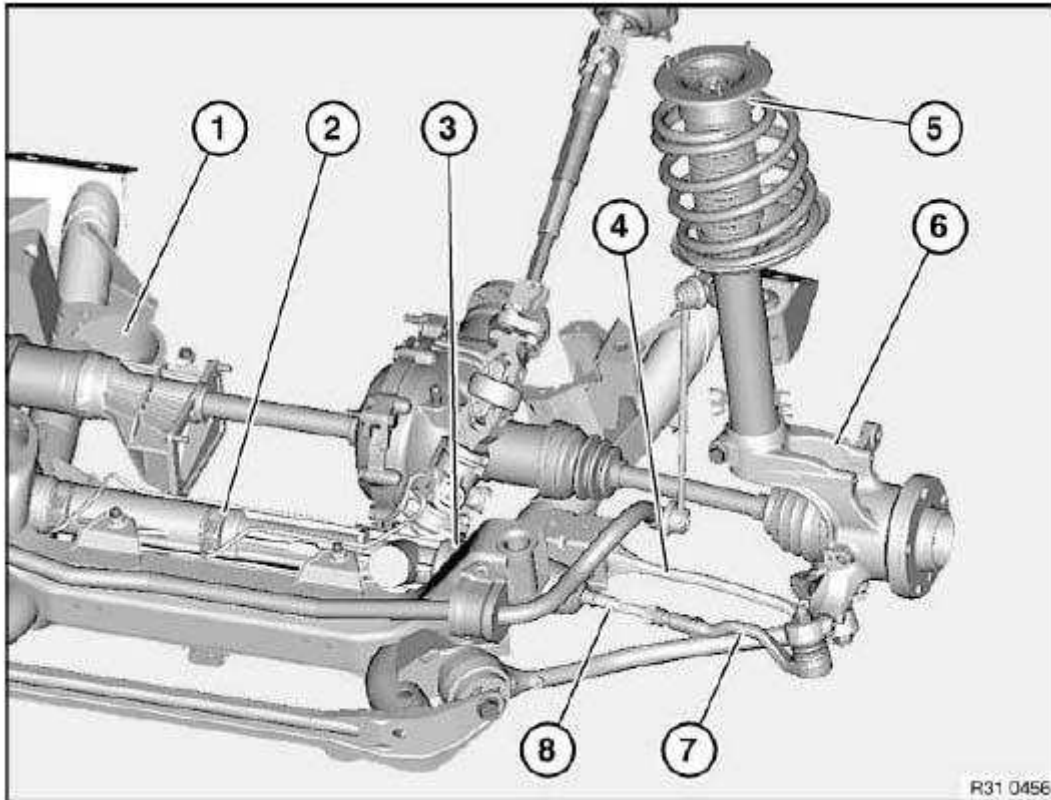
Front Axle Carrier, Steering Gear, Gaiter, Swivel Bearing And Tie Rod
